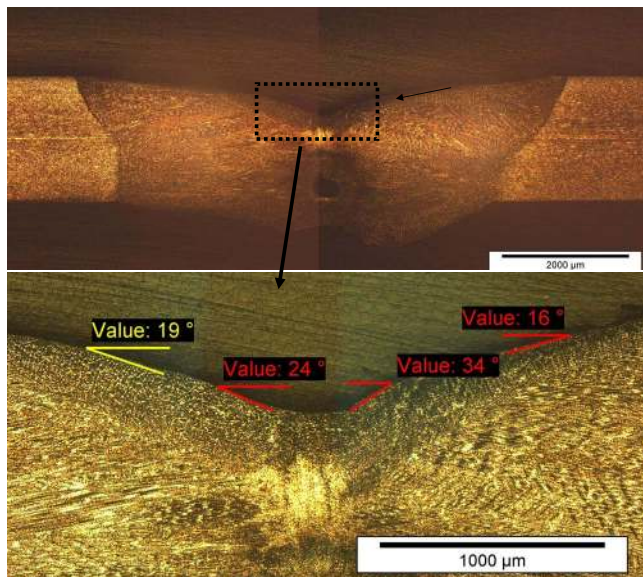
(Color online) Cross section of the weld pool for a laser power of 2000 W and a welding duration of 2 s. The small black arrow shows the flow direction (top). Surface inclination angles in the center of the weld pool (bottom).
